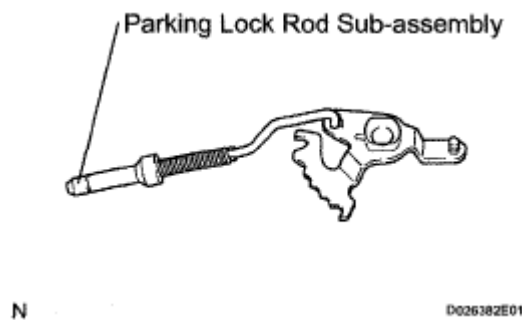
Identifying Parking Lock Rod Sub-Assembly
